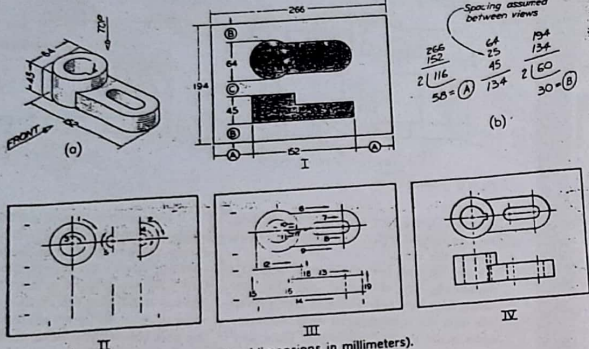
Two-View Mechanical Drawing (dimensions in millimeters).
